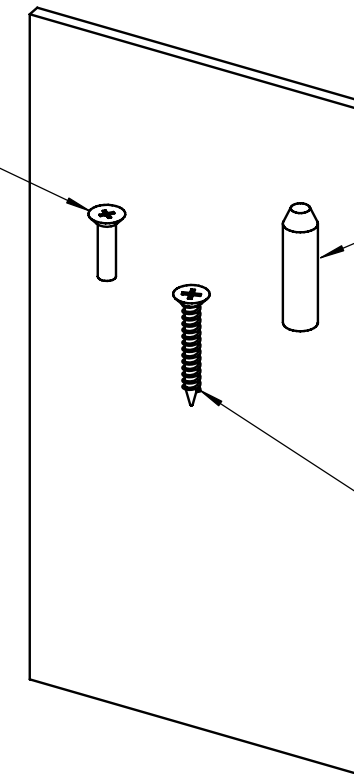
INSTALLATION (EXPLODED VIEW)
